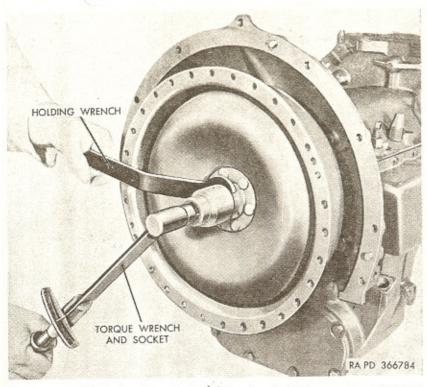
Tightening input shaft nut using holding wrench-B7950256.
